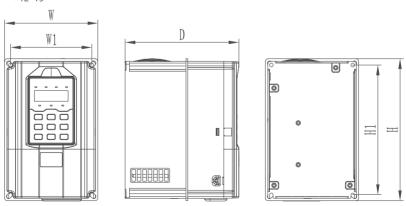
Outline and installation dimensions of T2~T5 frame
